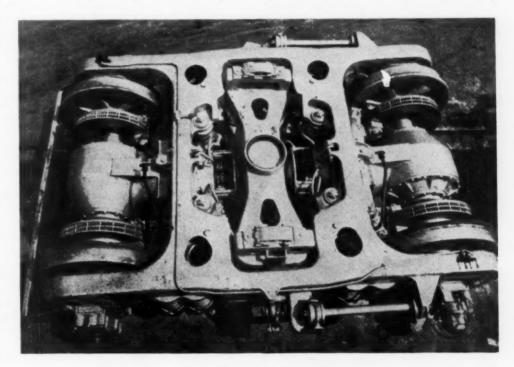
"PROSPECTOR" TRUCK ASSEMBLY
